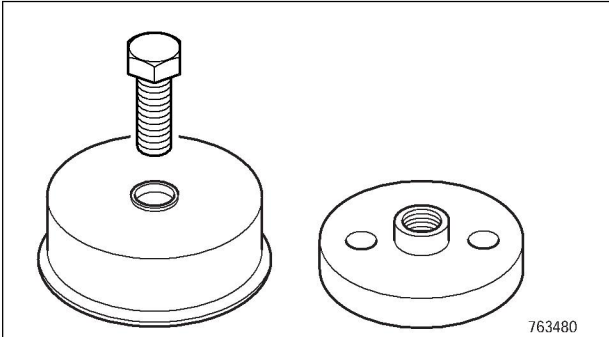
892/01156 Crankshaft Rear Oil Seal Fitting Tool
